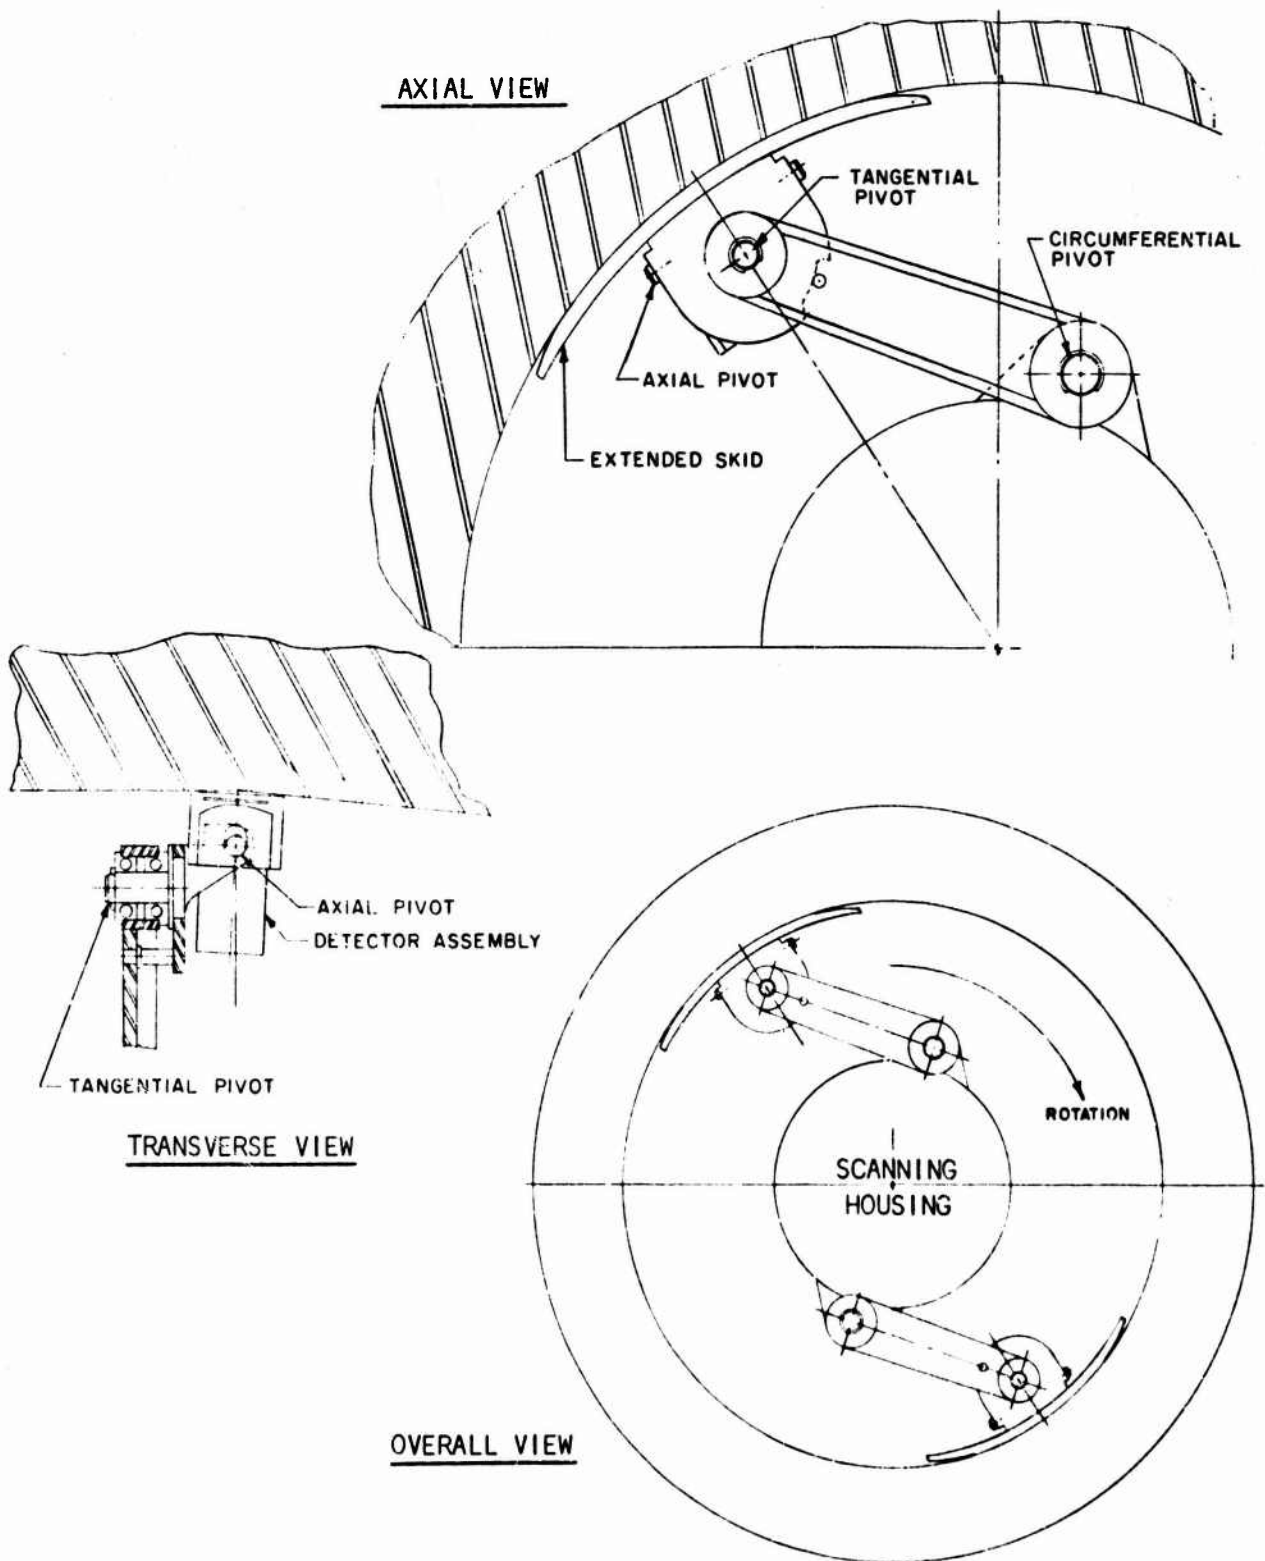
DESIGN CONCEPT OF CENTRIFUGAL DETECTOR-HEAD ASSEMBLY
